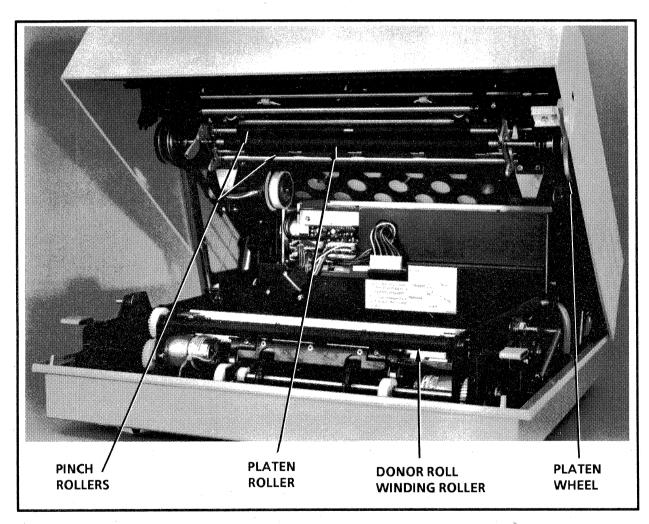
Platen Roller, Pinch Rollers and Donor Roll Winding Roller
